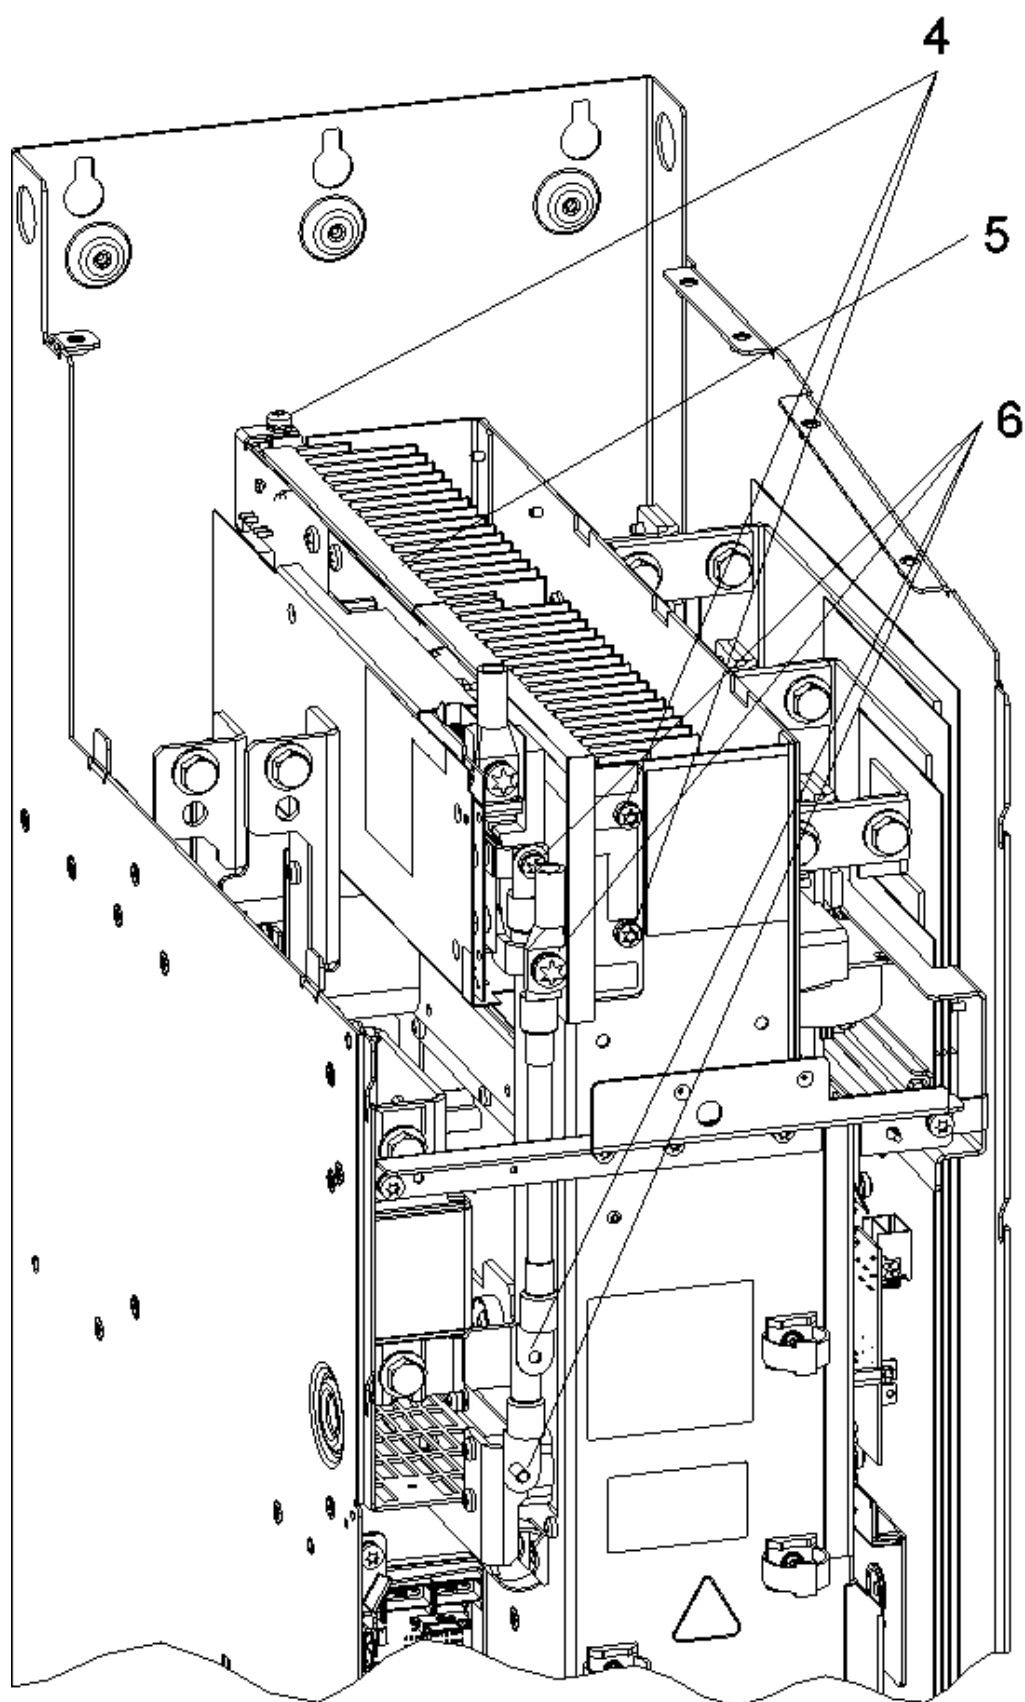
Installing a Braking Module in an Active Line Module or a Motor Module (type GX) – steps 4 - 6
